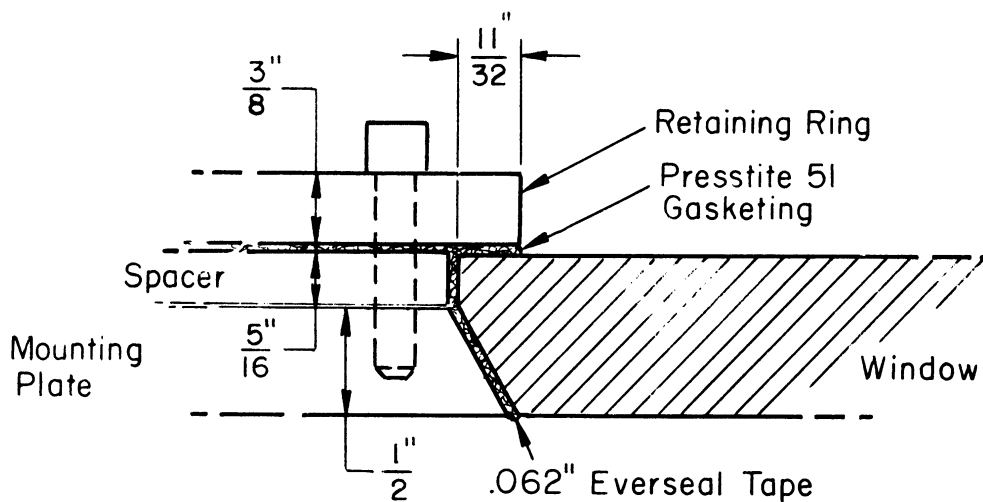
(c). Cutaway view of photographic window mounting at spacer.
